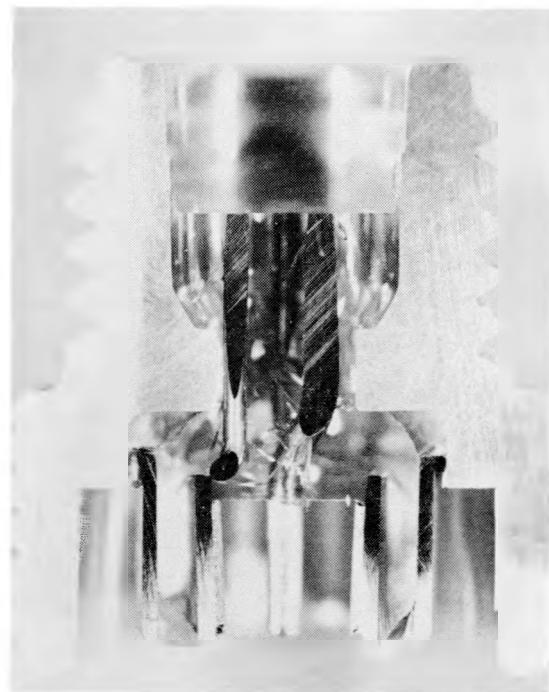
Cross-section of injection molded-sealed component fabricated with aluminum-2024 shell and Hastelloy C-276 rings and pins and sealed with S-glass.
